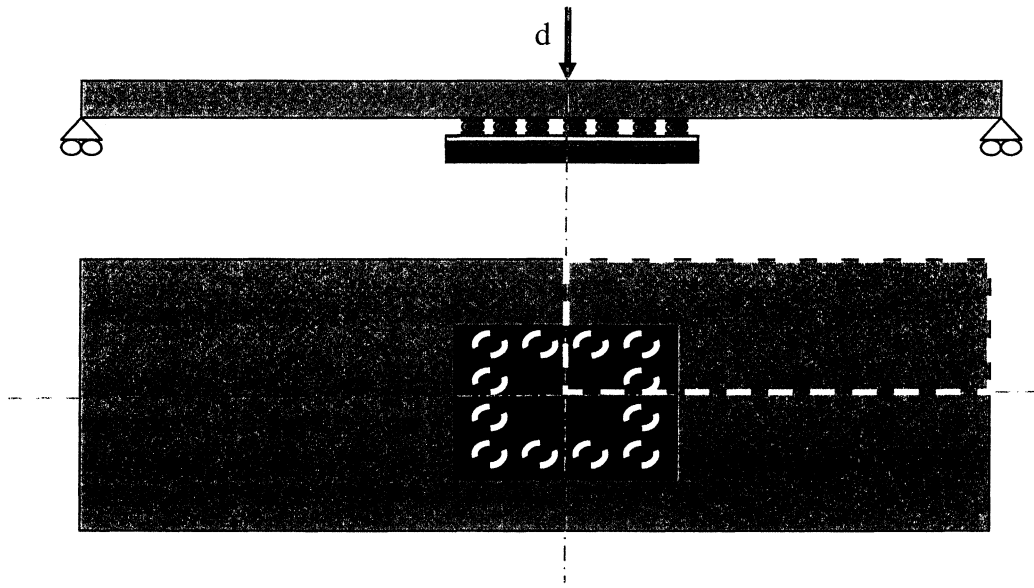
Complete Assembly with the Package at the Center of the PCB
